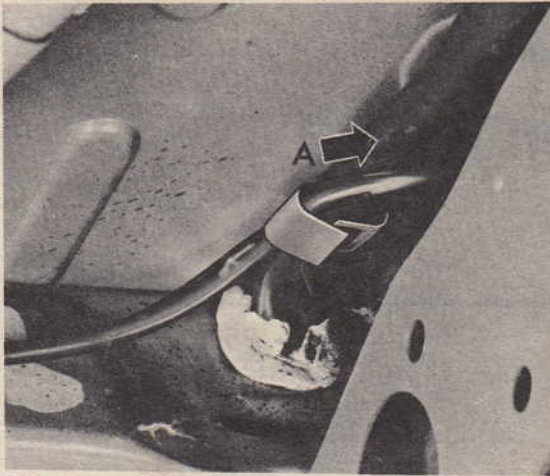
Route wiring below vehicle as shown and secure with clip of main harness
